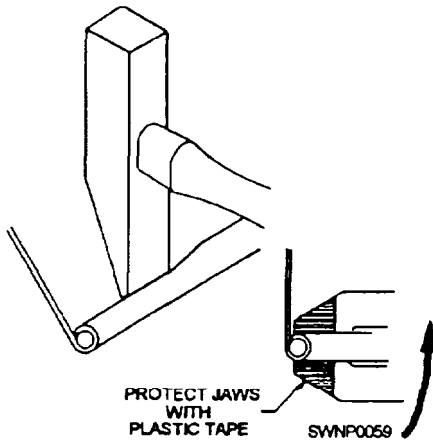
Setting a wire edge with a setting hammer or pliers.
